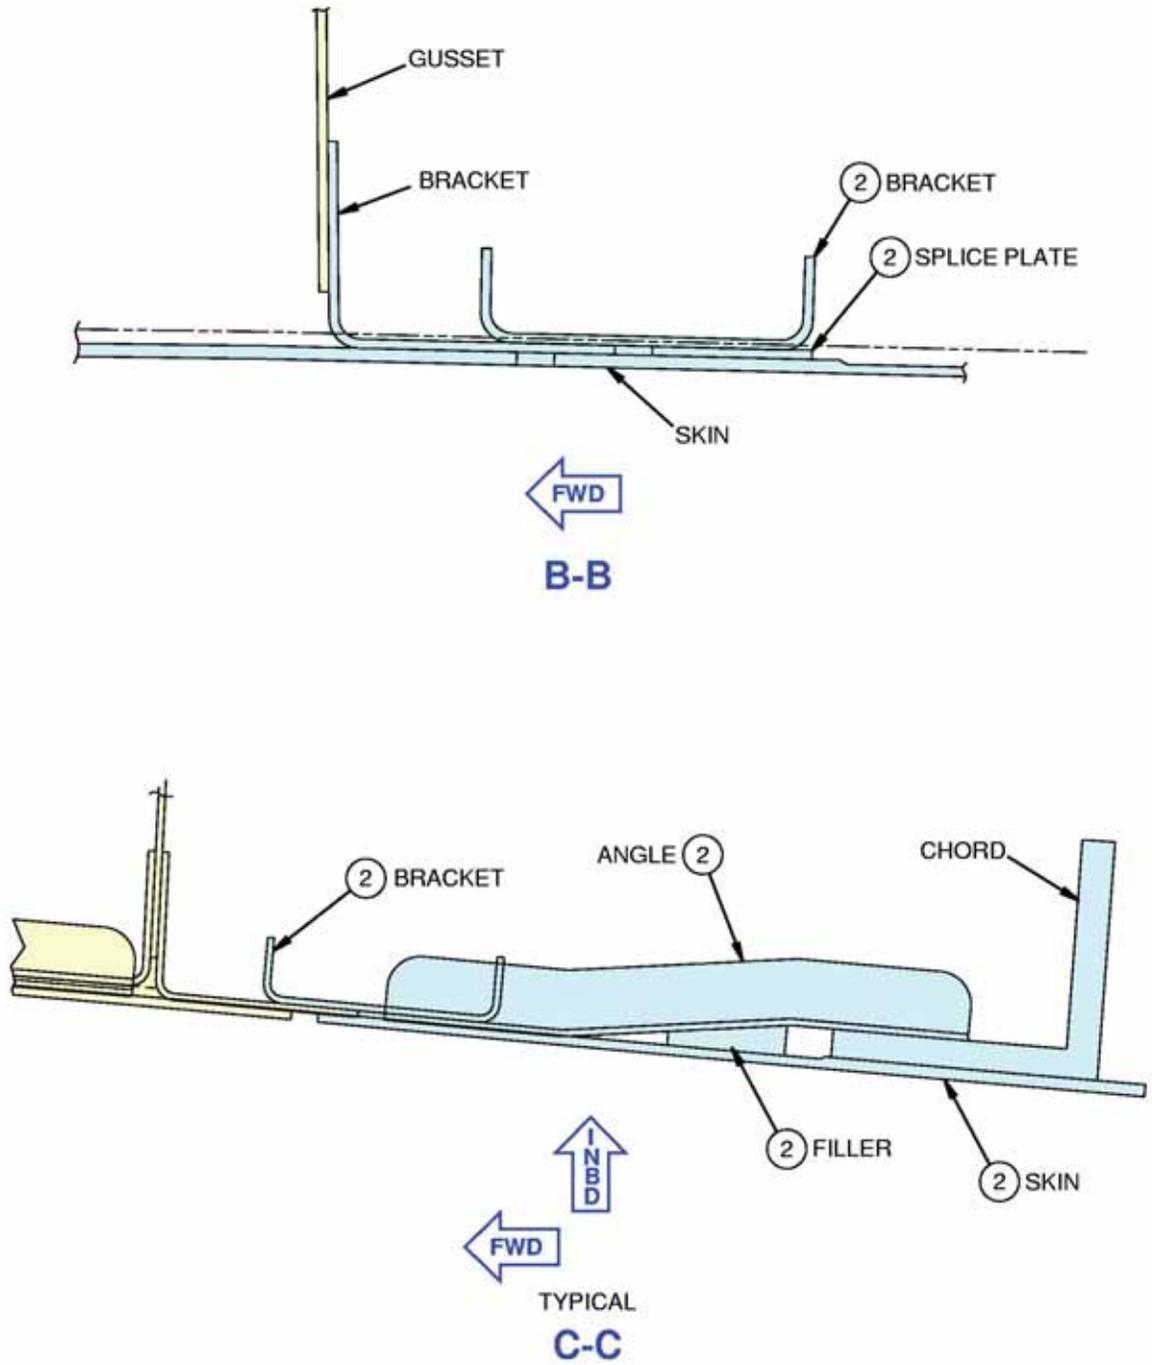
LEFT SIDE - STA 2370 SKIN PANEL REMOVAL (SHEET 3 OF 4)
